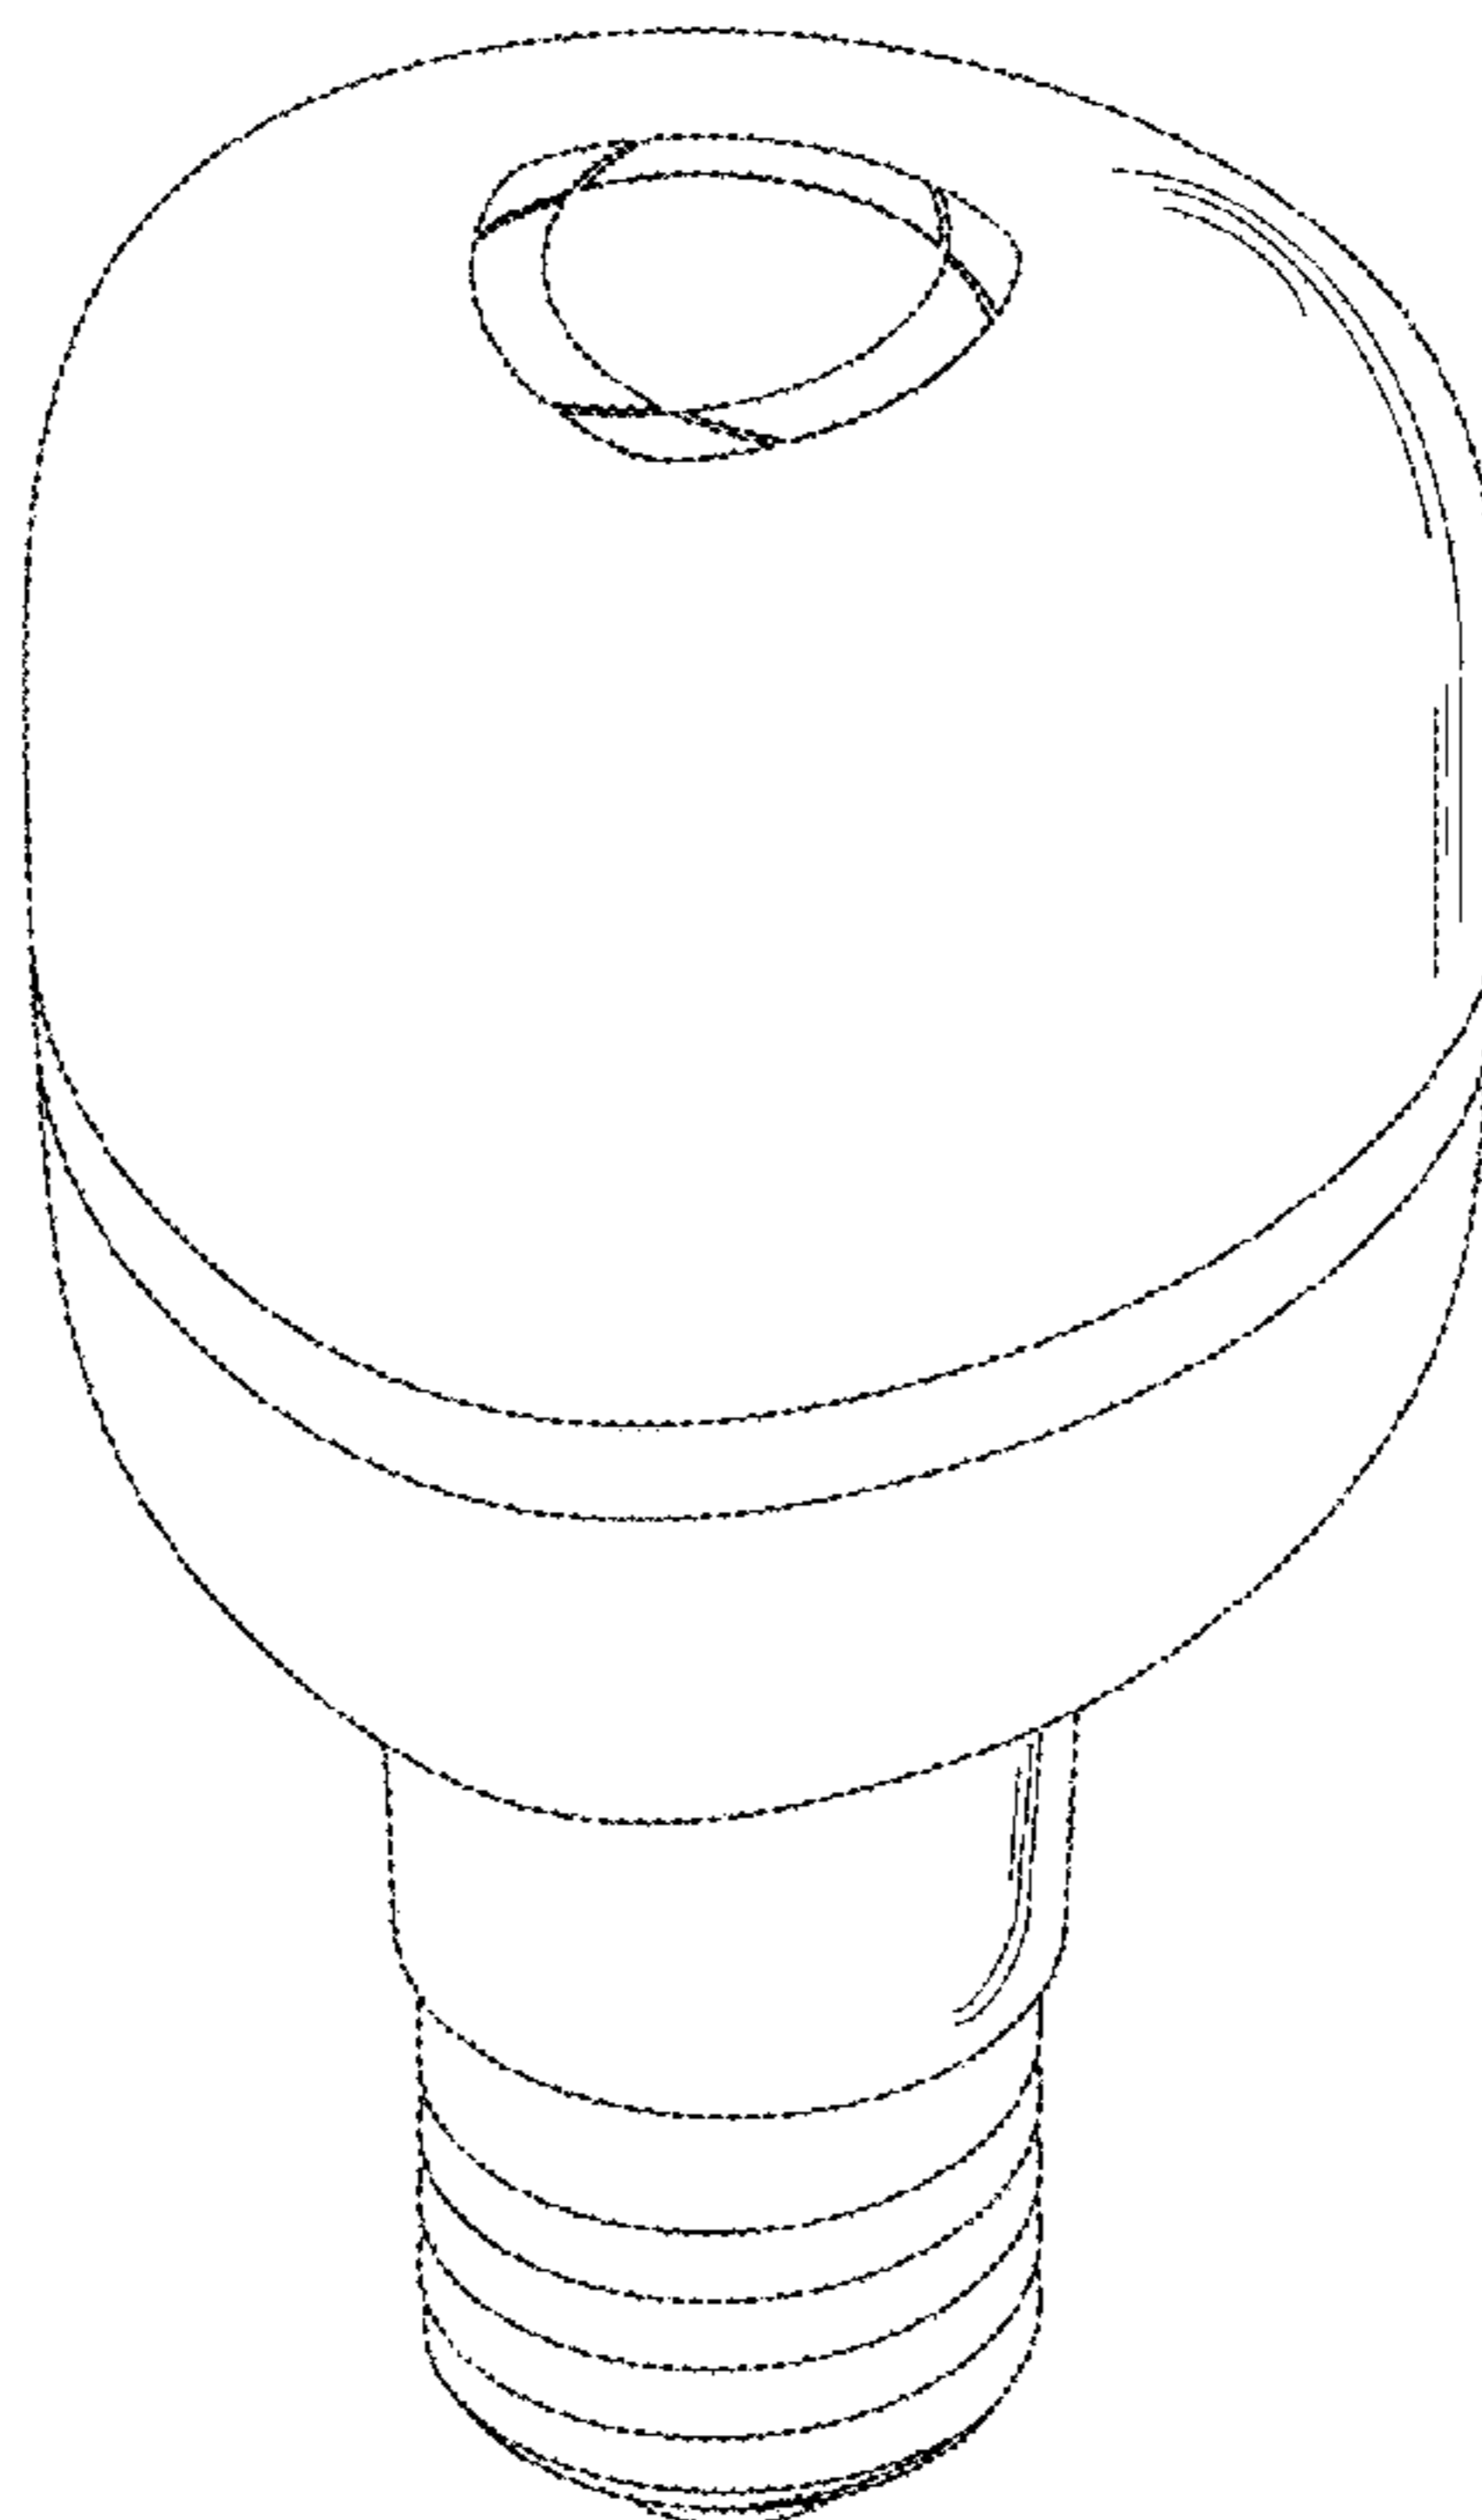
is a top view of one embodiment of a motion detecting lightbulb assembly showing my new design;
